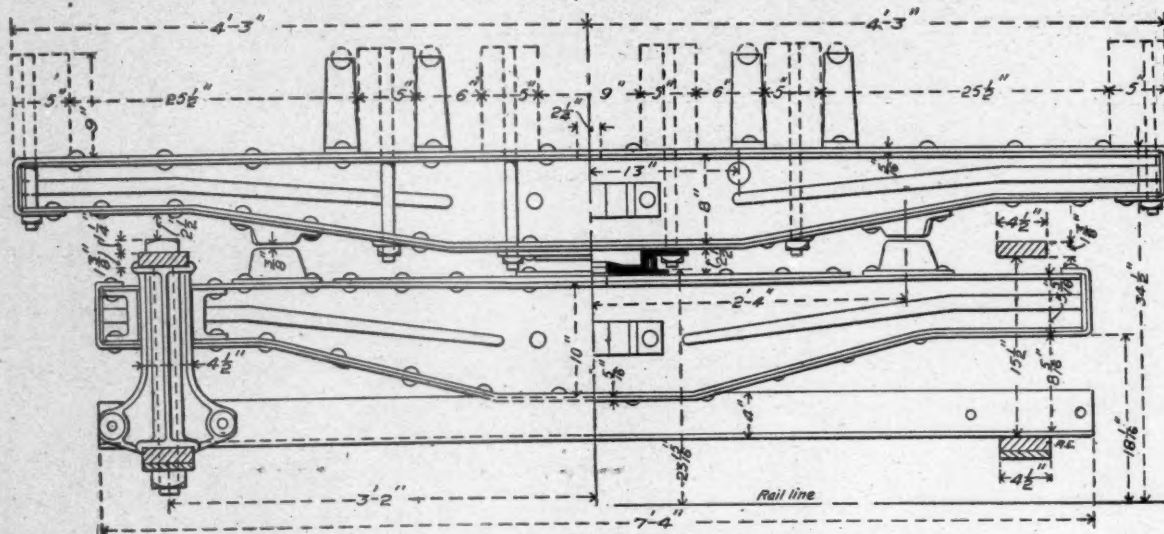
Application of Bettendorf Bolsters. 80,000-Pound Cars.—C. B. & O. R. R.
